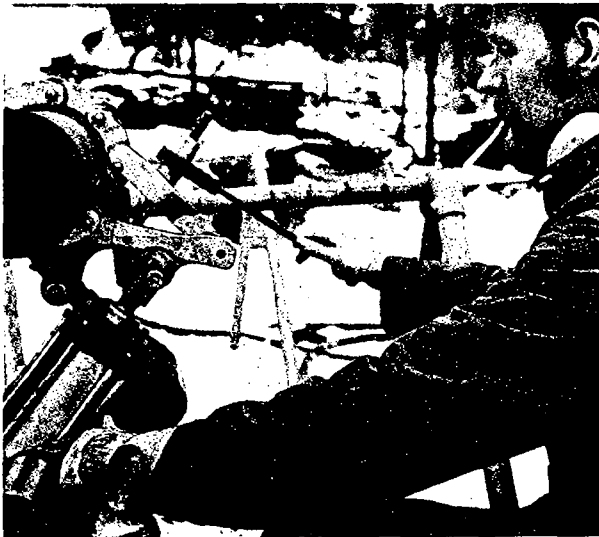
Semi-automatic, pneumatic tube cutter ensuring a perfect 90° cut, a prerequisite for easy and safe welding
